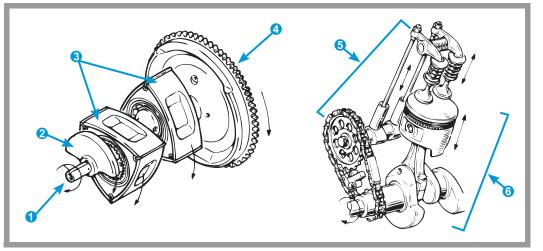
All rotary engine parts rotate in the same direction, unlike piston engines. 1 Eccentric shaft 2 Balance weight 3 Rotors 4 Flywheel
